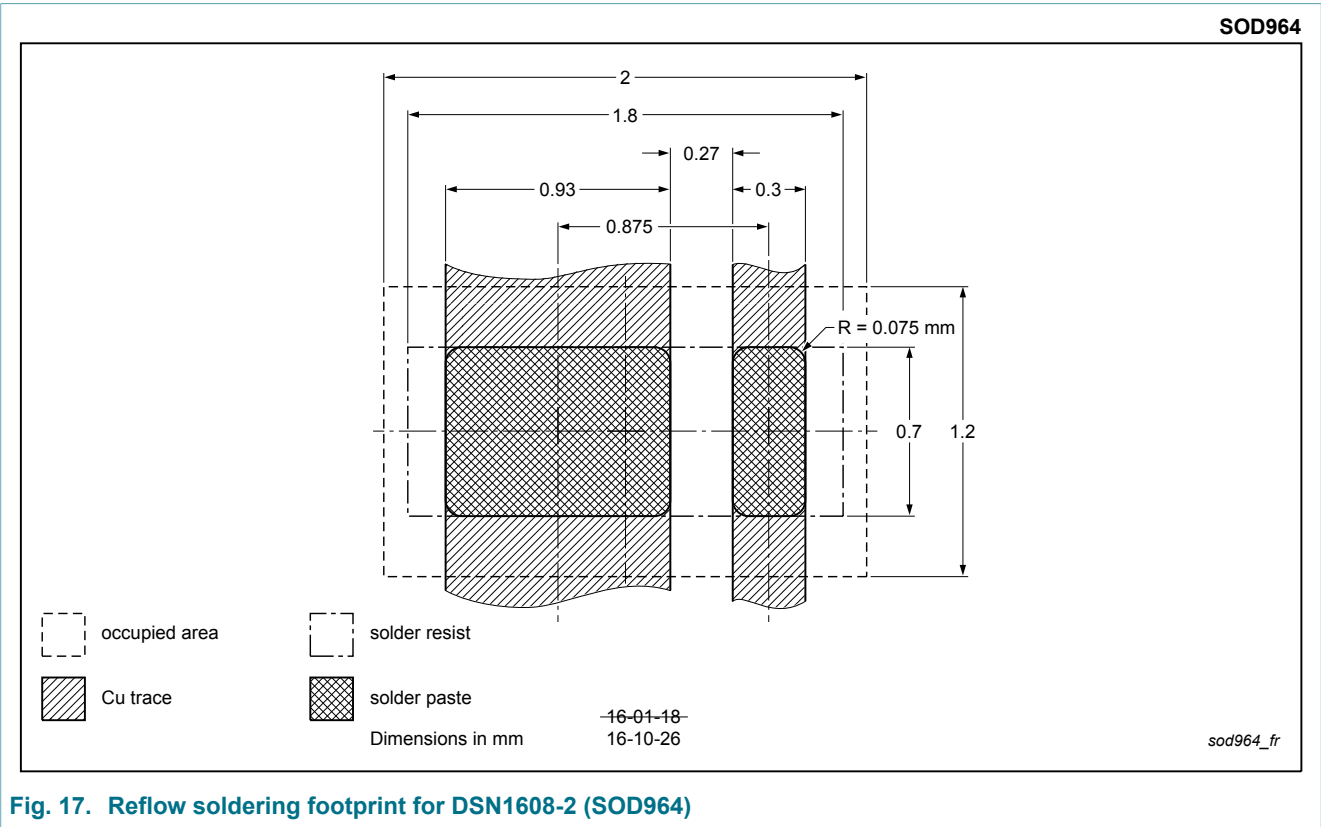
Reflow soldering footprint for DSN1608-2 (SOD964)
